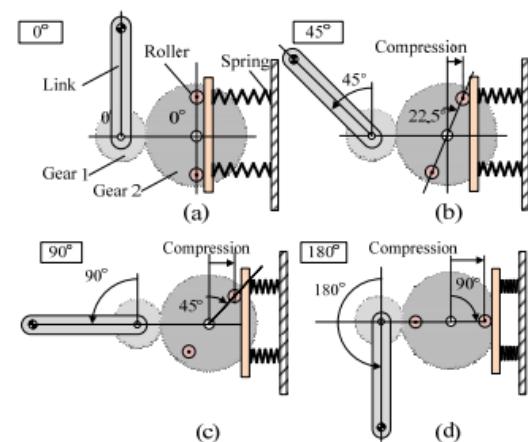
Operation of counterbalance mechanism based on gear and roller when θ = (a) 0°, (b) 45°, (c) 90°, and (d) 180°
